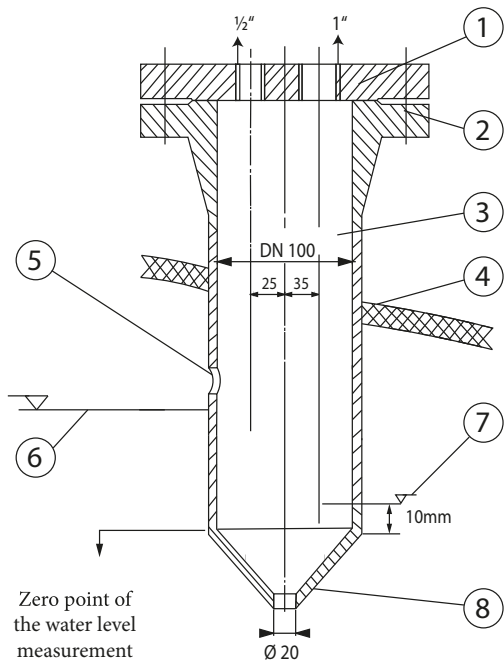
Installation example 1, usage with protection tube inside the boiler.
